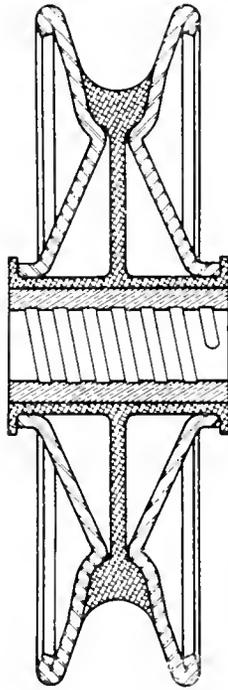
Cross Section of Steel Flanged Trolley Wheel
